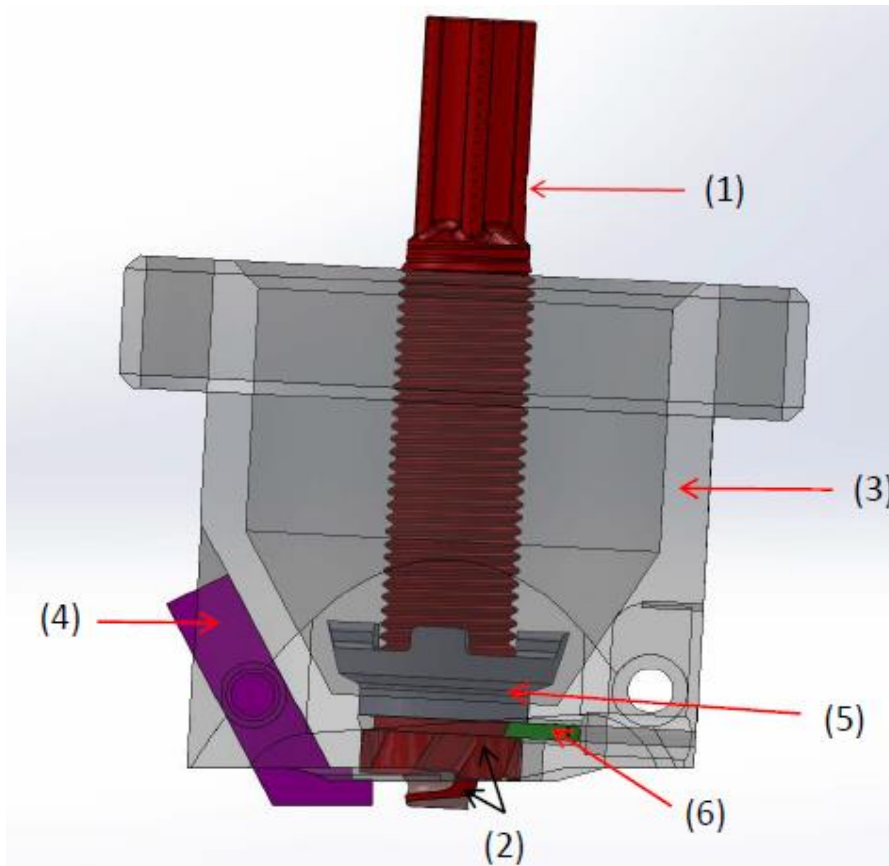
Illustration of the main components in the HYB Pin Point Extruder head; (Ø.Grong, Personal Communication)
